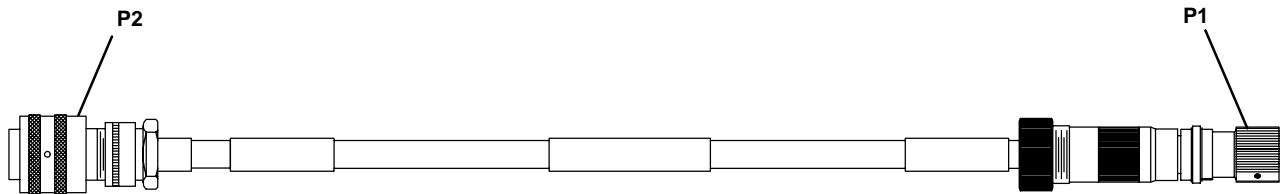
PA-R/T Cable Assembly (10535-0720 Rev. B)
